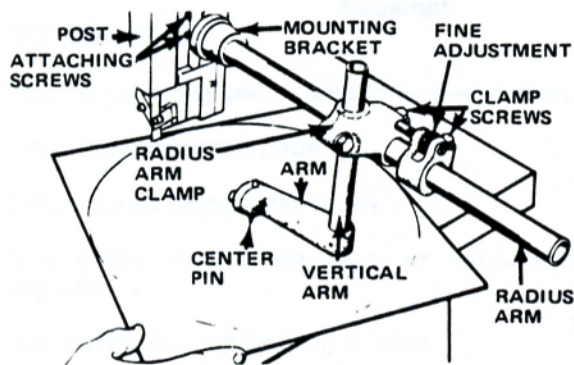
CUTTING A RADIUS WITH DISK CUTTER.
